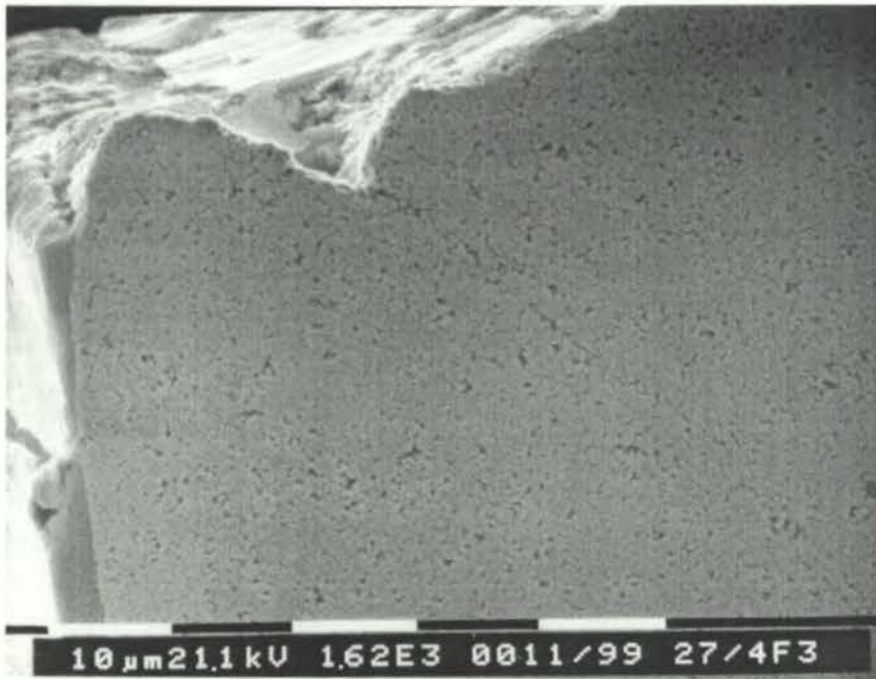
138 Section through of a KMF tool showing propagated cracks with point of initiation and workpiece adhesion on smoothly worn flank face, after cutting Waspaloy for 3 minutes at 50 m/min and 0.08 mm/tooth
